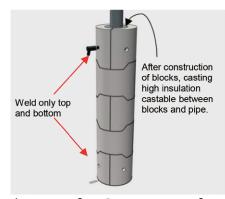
Appearance of Stud gun Welding Fig. 4 Image after Construction of New KSB
